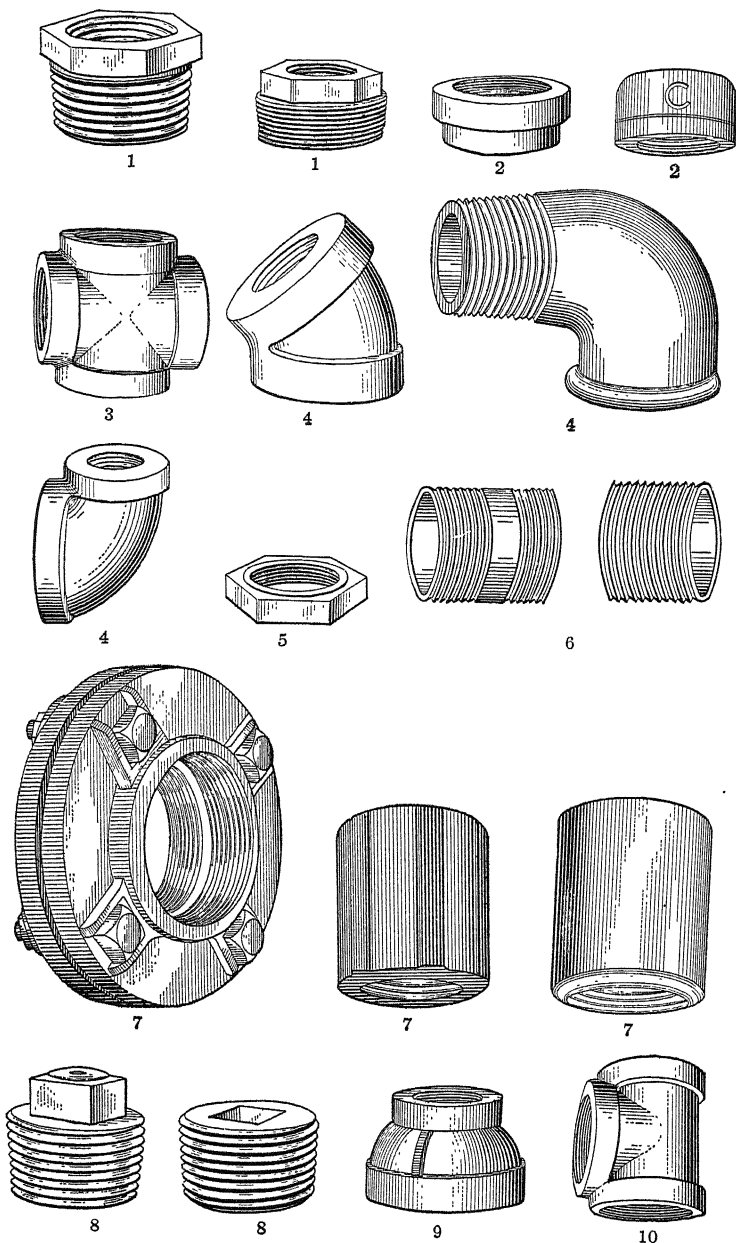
PLATE XXXVIII.—Pipe Fittings. 1 Bushings; 2 Caps; 3 Cross; 4 Elbows; 5 Lock Nut; 6 Nipples; 7 Pipe Unions; 8 Plugs; 9 Re-
